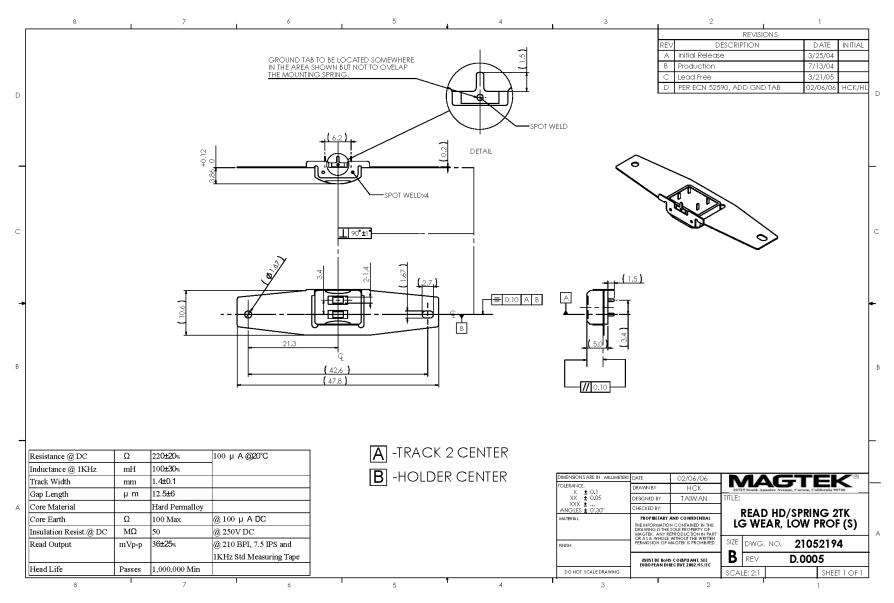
Head Spring (Used for Beam Style Head Mounting)
